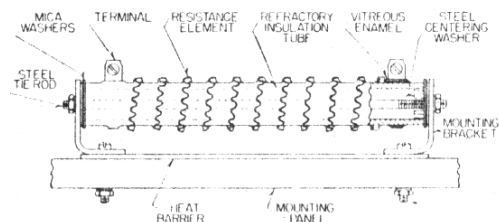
Cross-section view of a Type D Ribflex Resistor Unit and its Mounting (Dwg. 5-C-2681)
